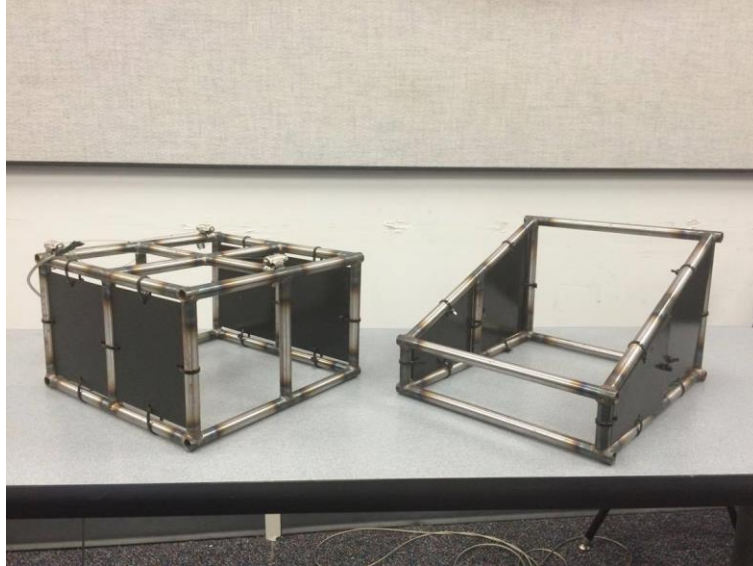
Circular hollow cross section scaled trapezoidal and square models utilized in second round of testing.
